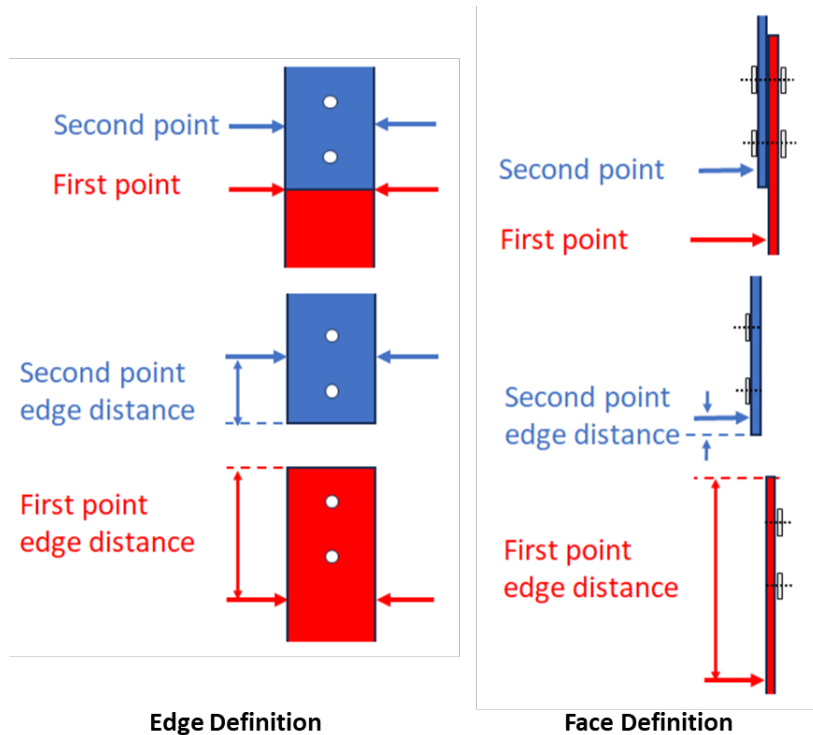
Bearing strain gauge definition for double fastener tests.
